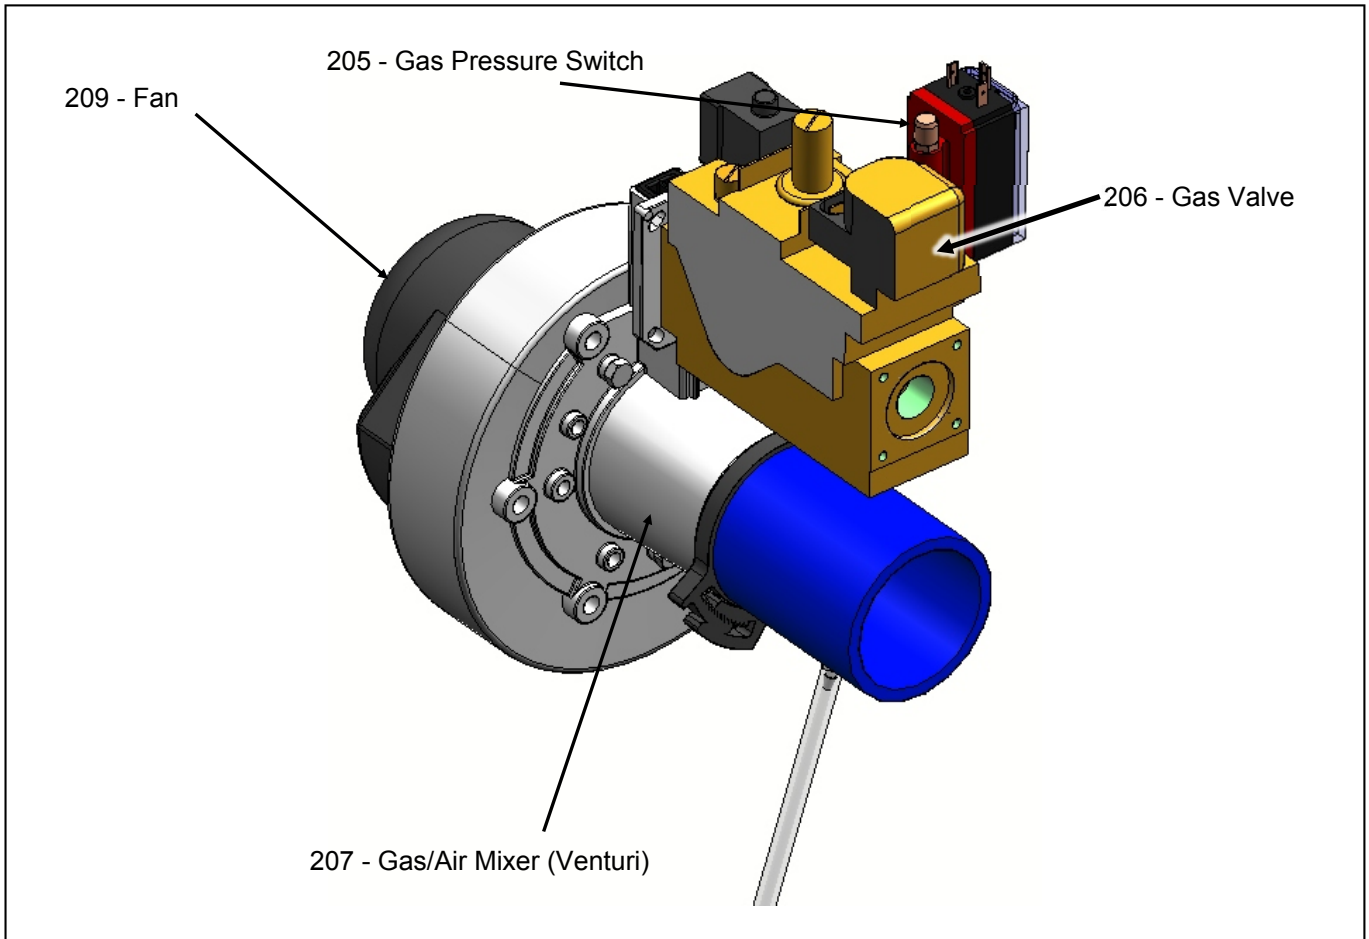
Combustion System Assembly Model PV95c/110c/140c
